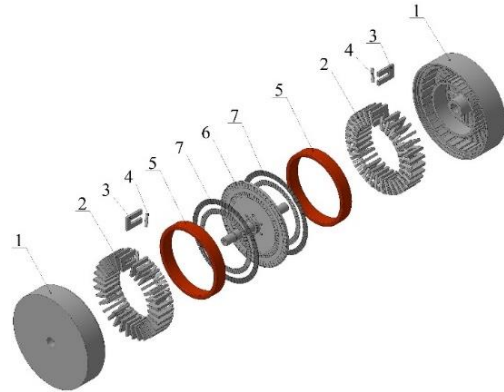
Disassembled 3D model of TFM-200/32 motor.
